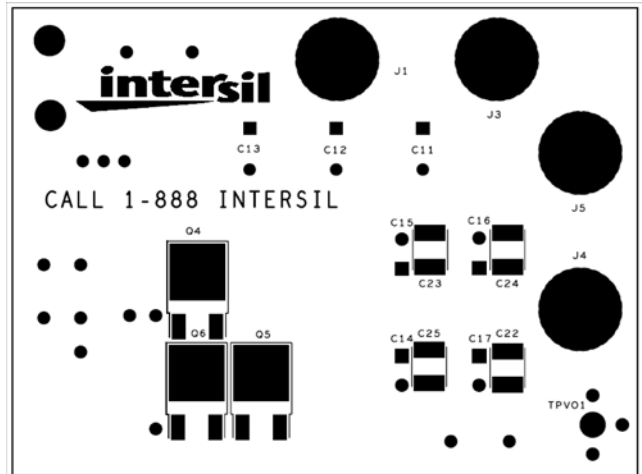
ISL8105BEVAL2Z - BOTTOM LAYER (SOLDER SIDE)
